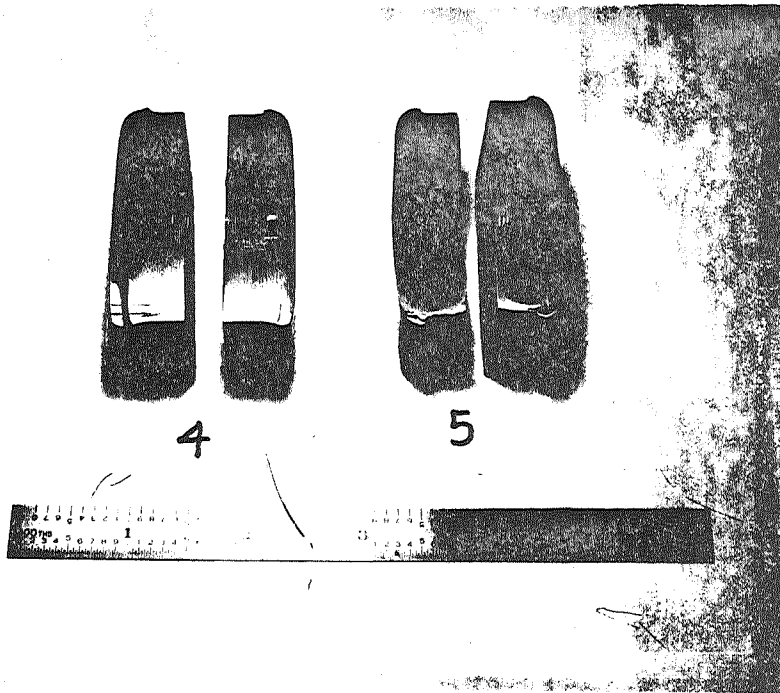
Section specimen of an explosively bonded steel blister (Reference 35).
